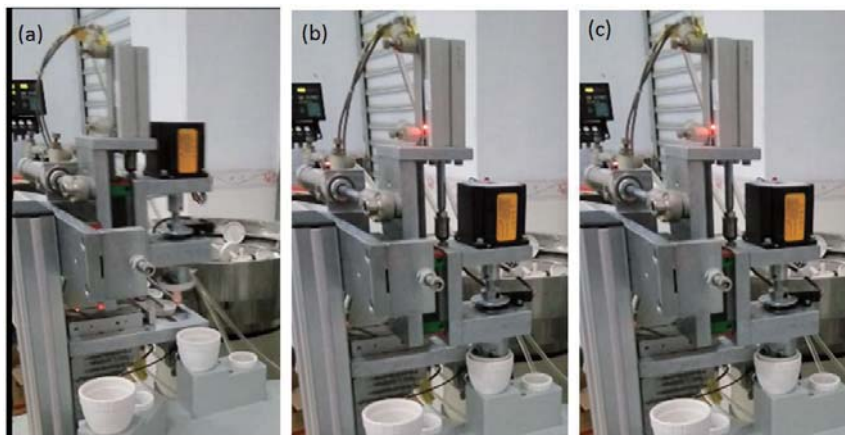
The process of actual assembly(a)clamping of work piece(b)thread screwing(c)adsorption of sealing ring
